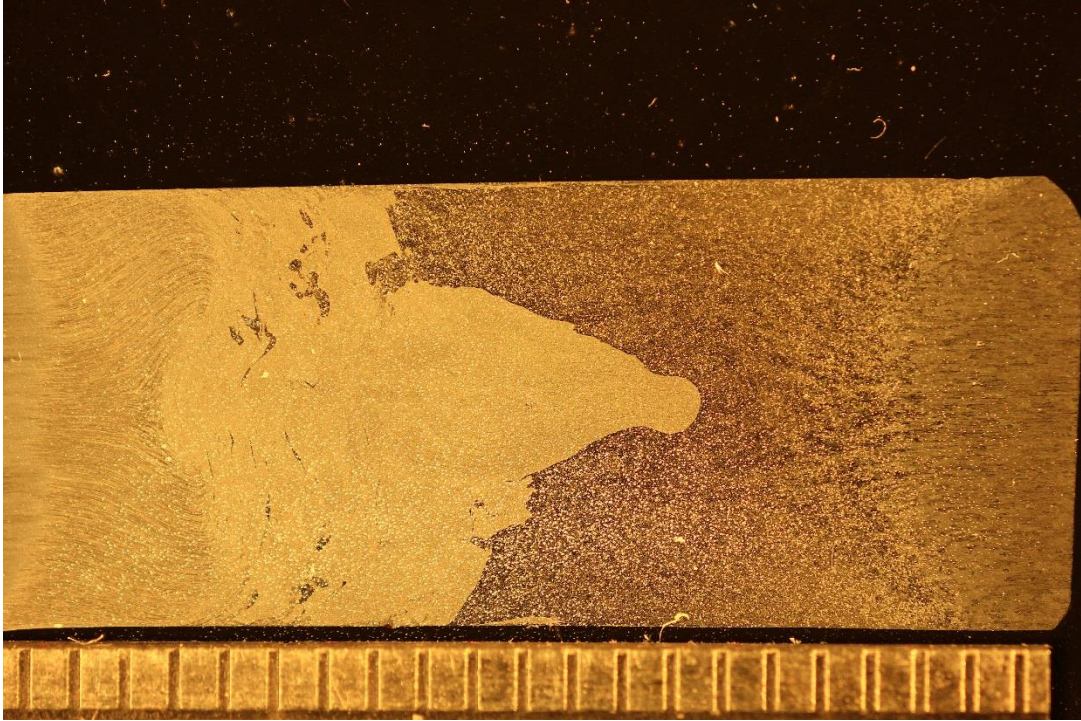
Macrograph of Weld 3 Sample 9
